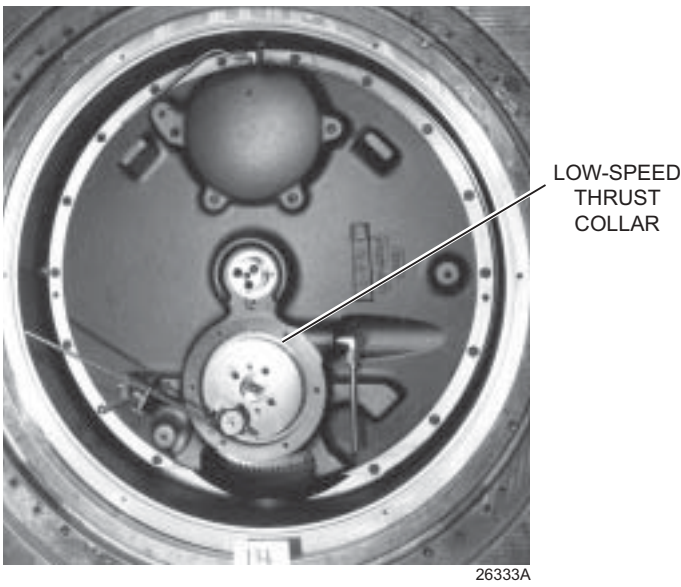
CHECKING LOW-SPEED THRUST RUNOUT
